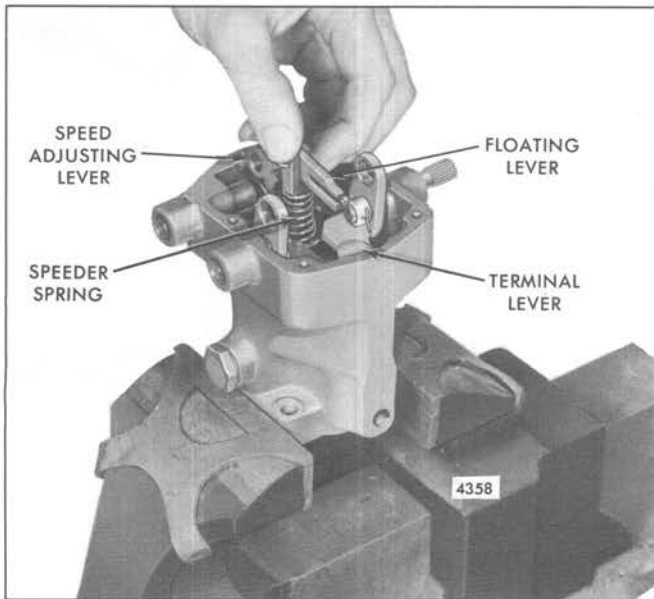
Removing Speed Adjusting Lever, Spring Fork, Speeder Spring and Pilot Valve Plunger Assembly
